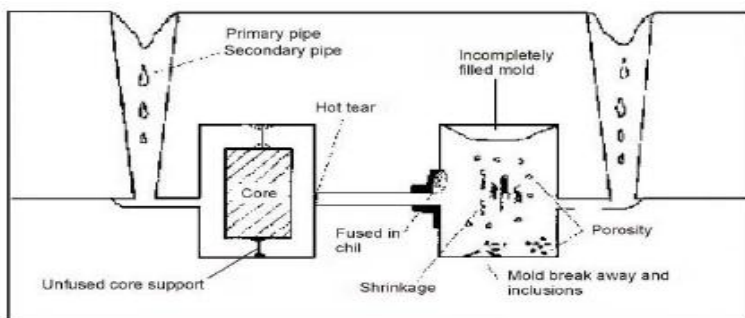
Composite Drawing of Typical Casting Defects
